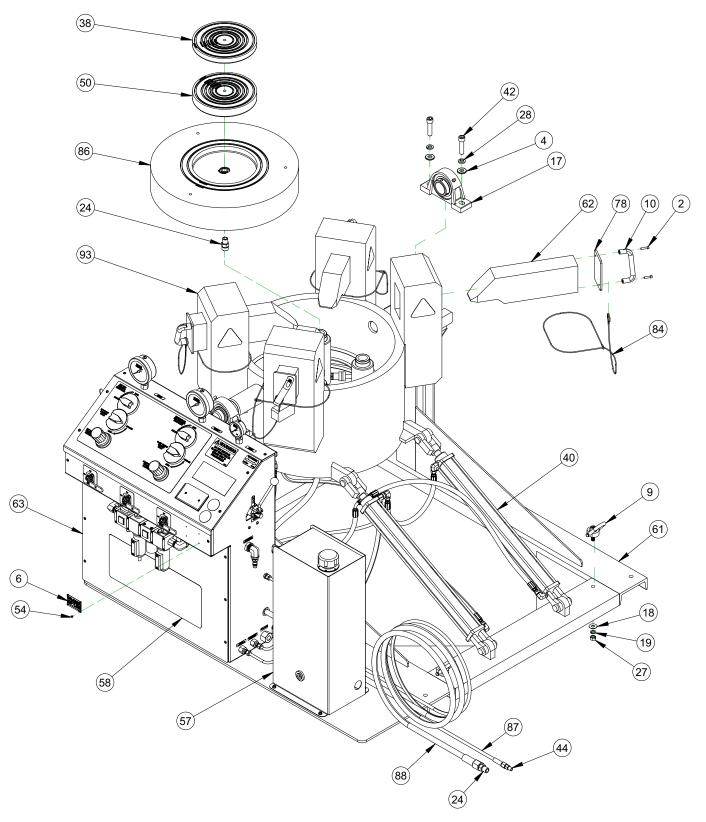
UFV-12-100T VALVE TESTER ASSEMBLY (P/N 88847)
